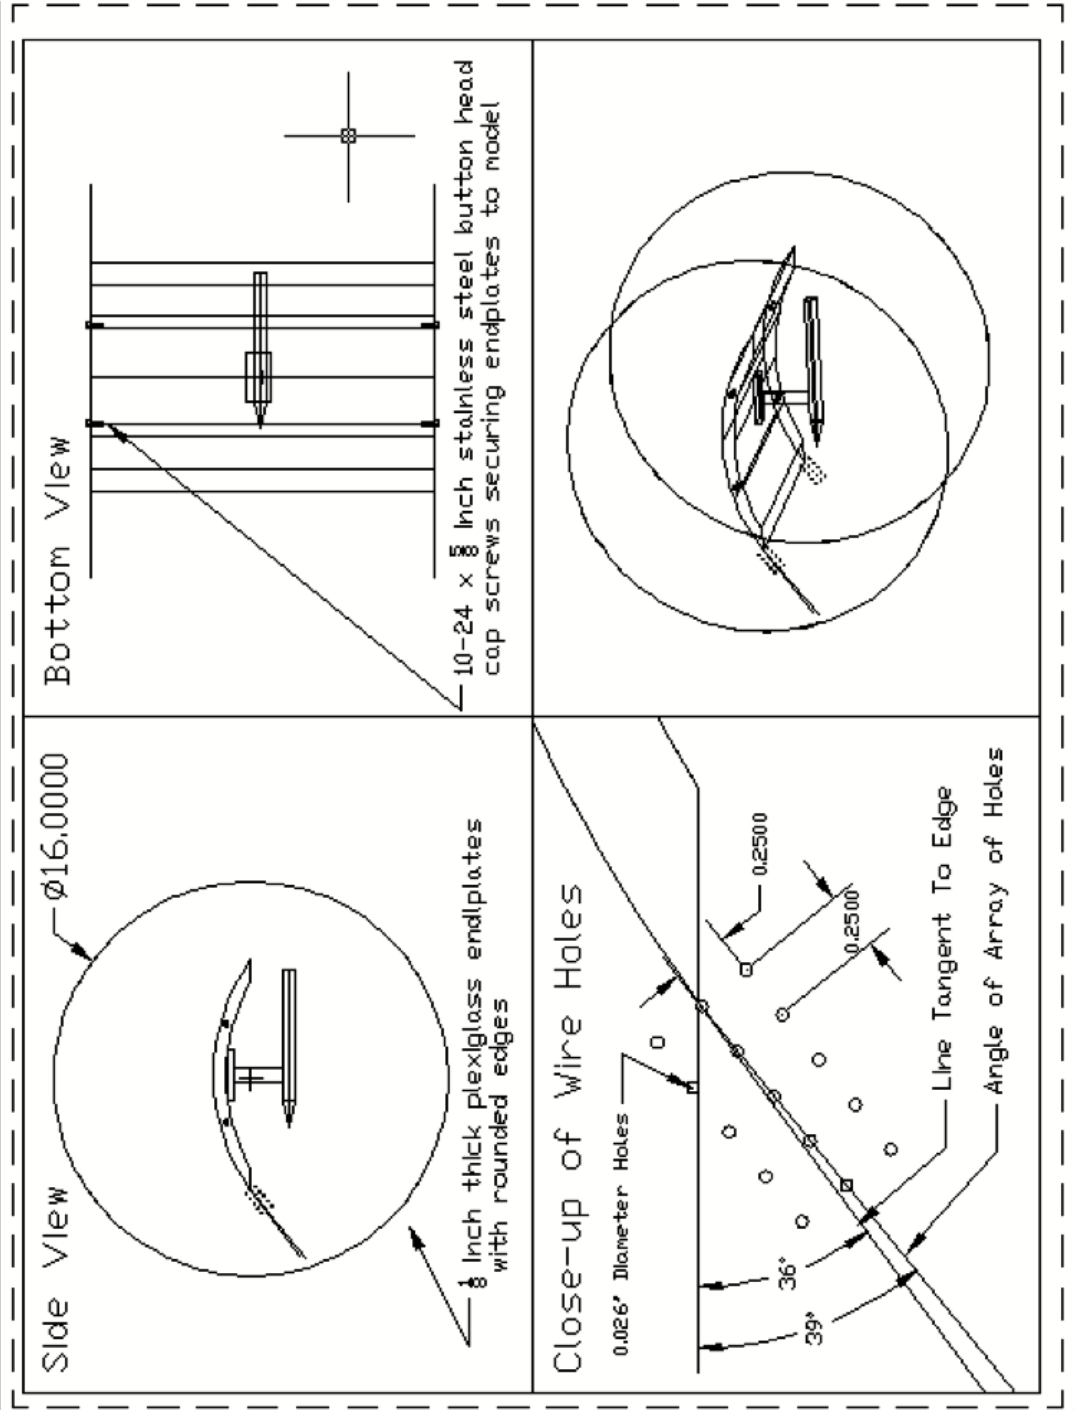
Detailed AutoCAD Drawings of Model, Endplates and Wire Holes
